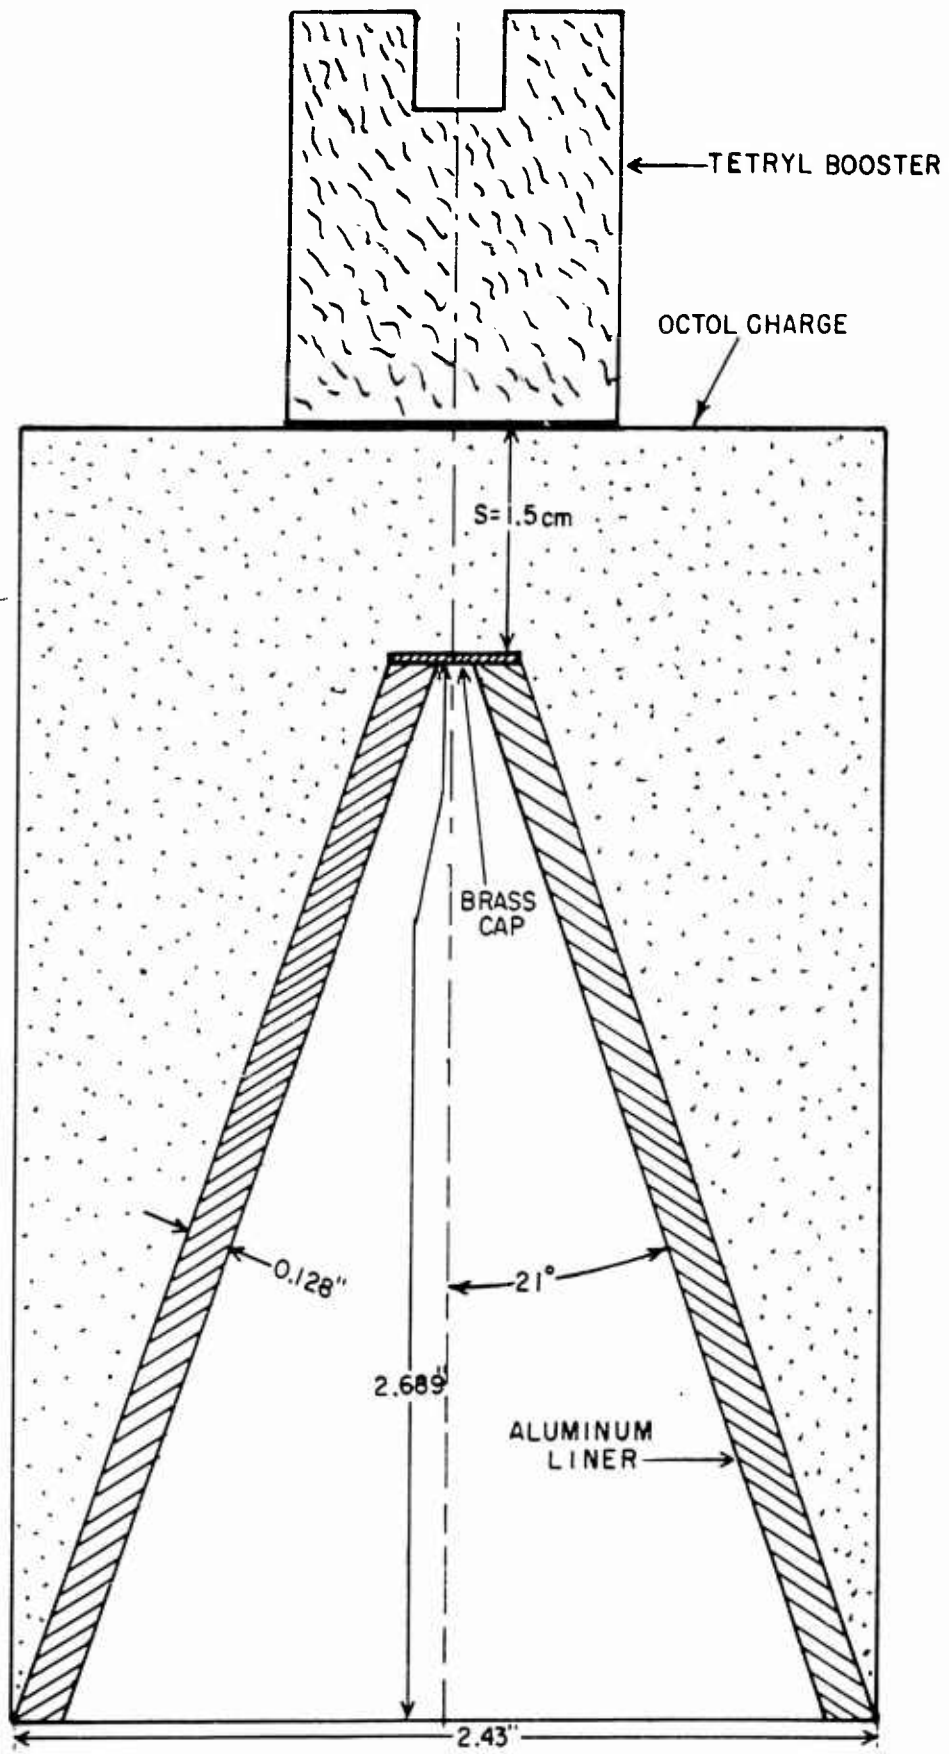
Sectional view of C-37-a liner as used in Test No. E-211.
